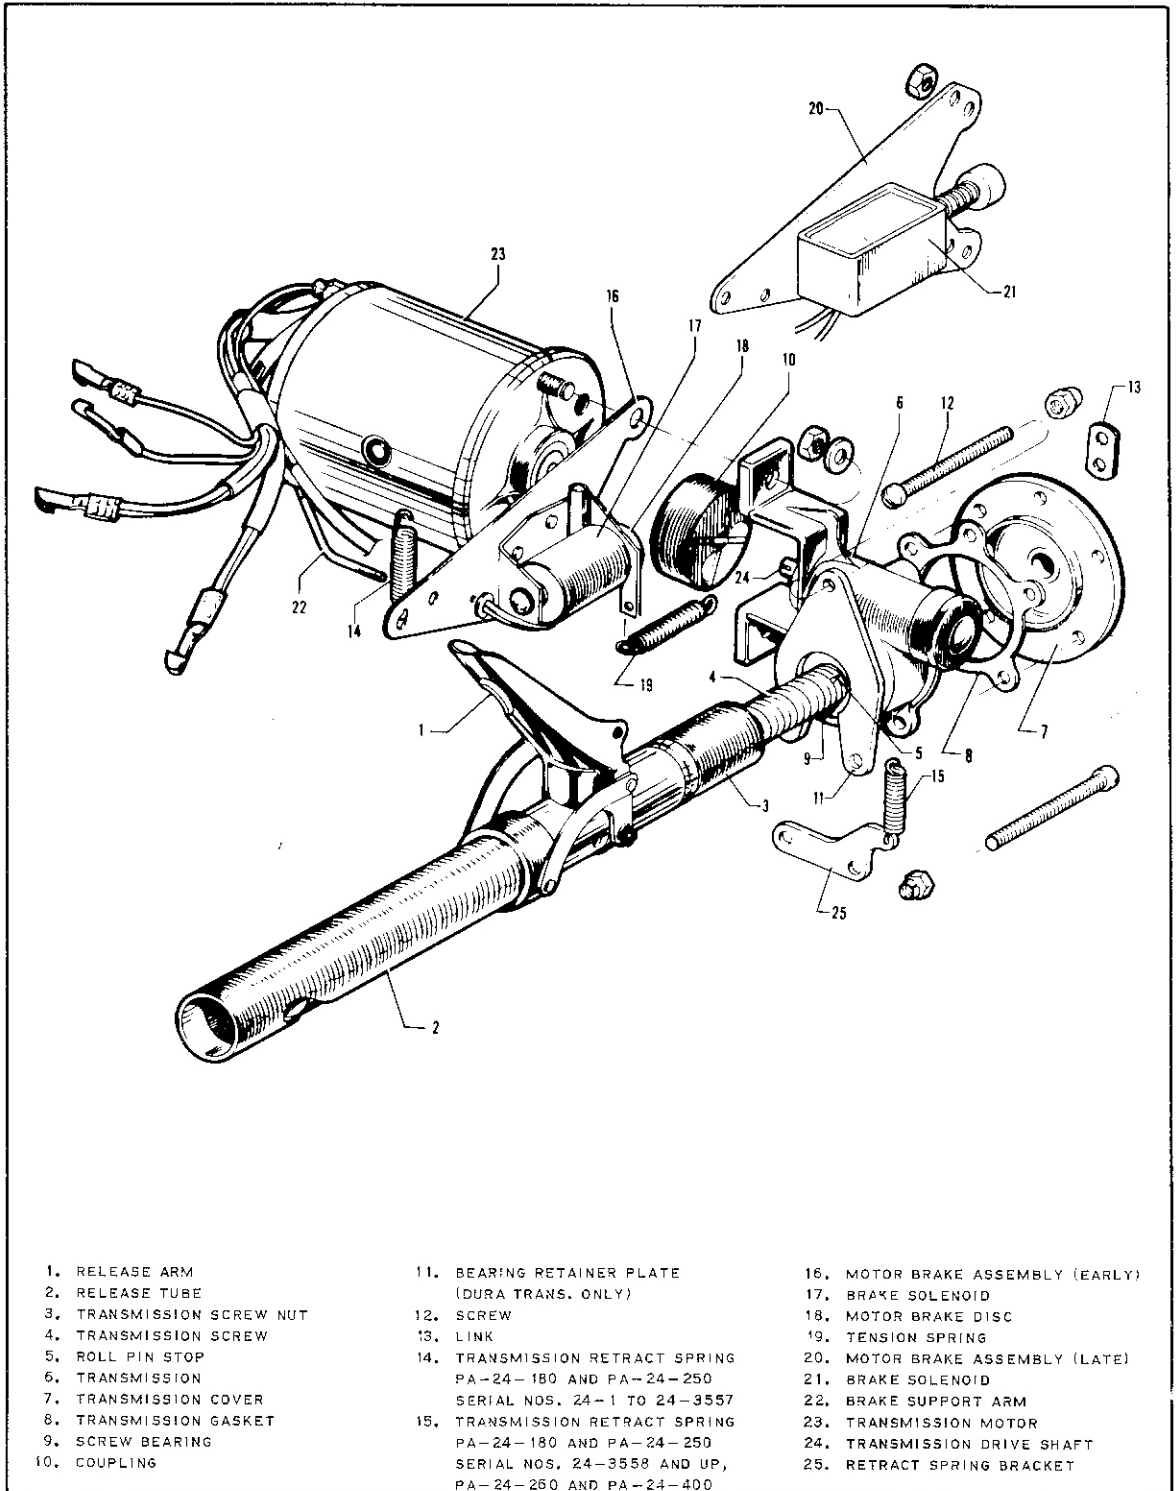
LANDING GEAR RETRACTION TRANSMISSION ASSEMBLY
